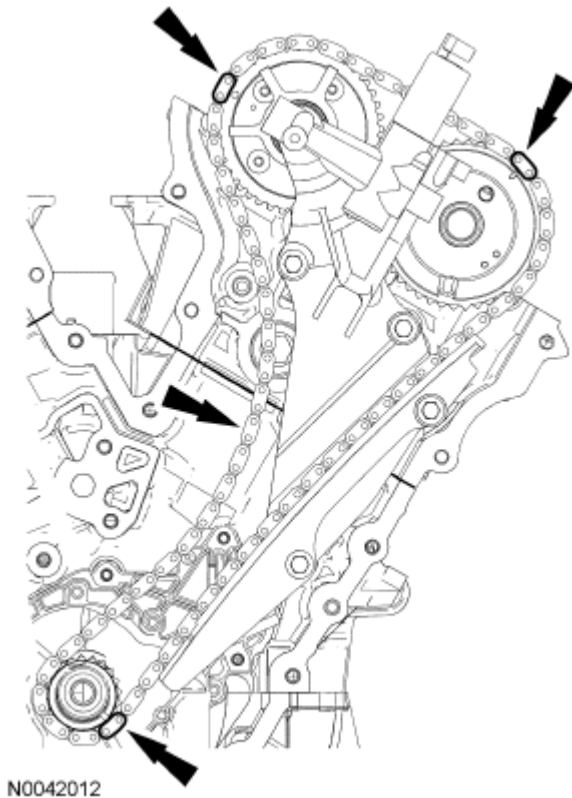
Aligning Marks On Timing Chain With Marks On Camshaft And Crankshaft Sprockets
